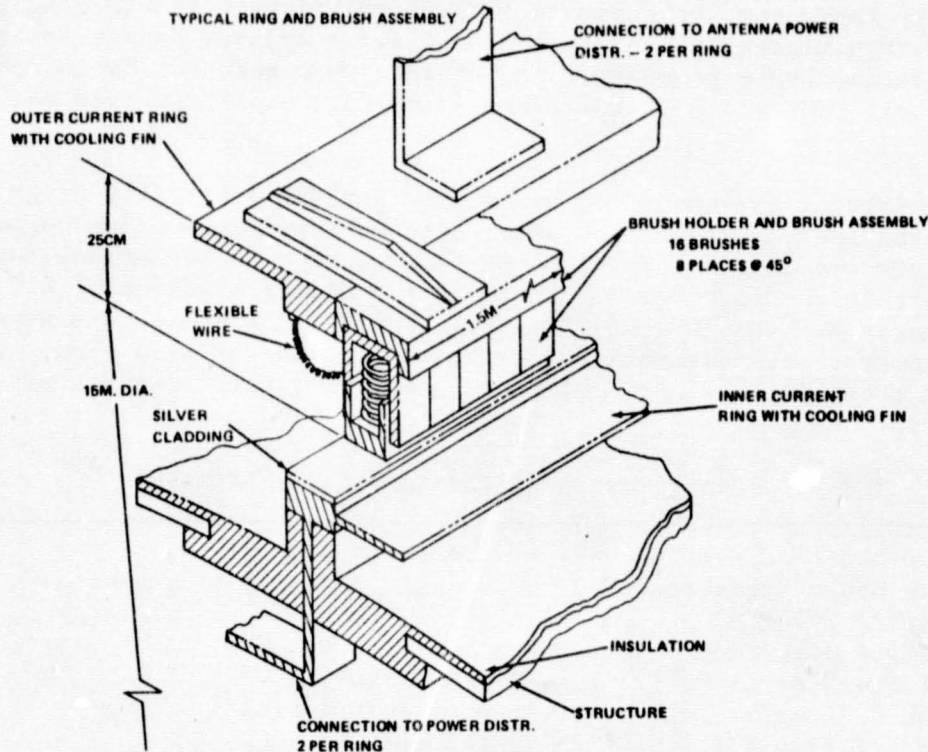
SPS Slip Ring-Brush Assembly
